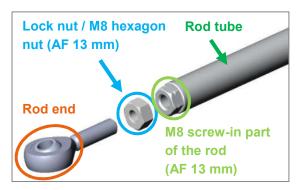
Rod ends with screw-in part, rods and hexagon nuts
